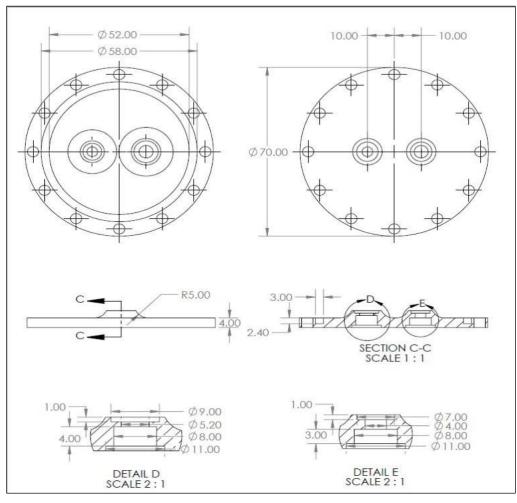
Base Flange Geometry (Source: Solidworks)
